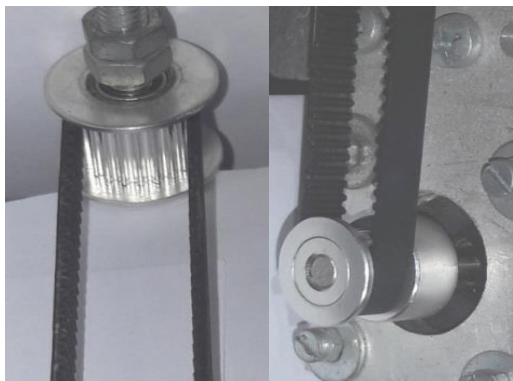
Belt, pulley and idler pulley mechanical transmission system
